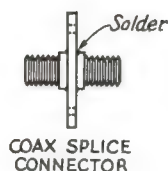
Feedthrough connector for coax line. A connector of the type used to splice sections of coax line together is soldered into a hole cut in a brass mounting flange. Amphenol bulk adapter 83-F1 may be used instead.
